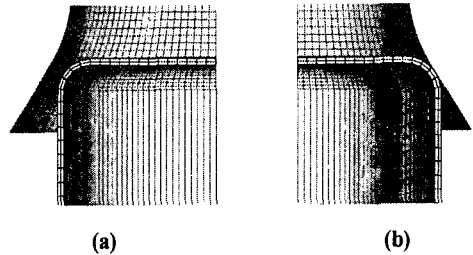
Initial shape of the tool positioning at the stage 3 with the initial design: (a) major axis; (b) minor axis
